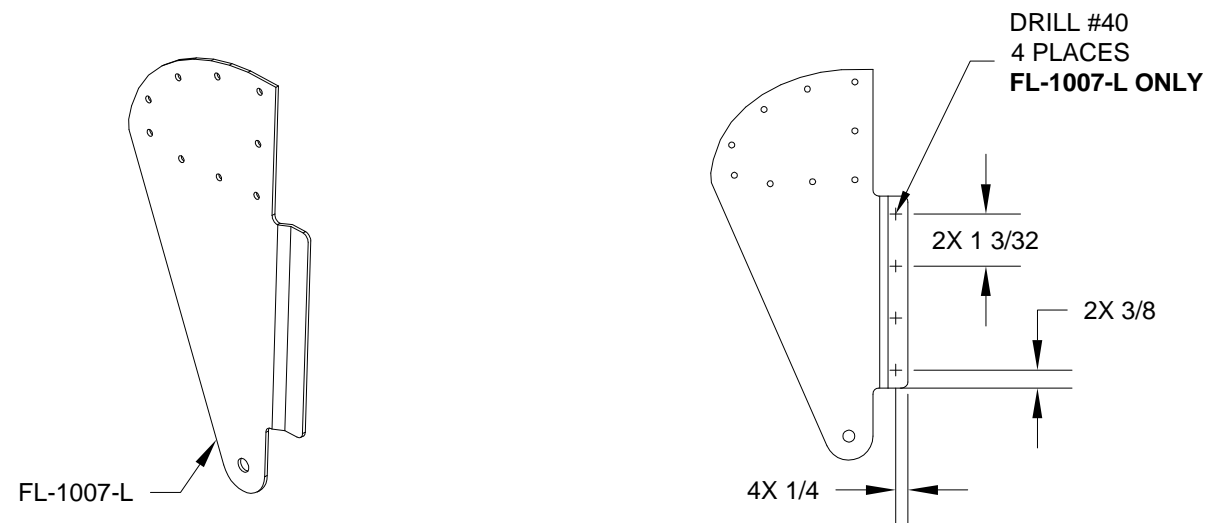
DRILL LEFT HINGE BRACKETS ONLY
